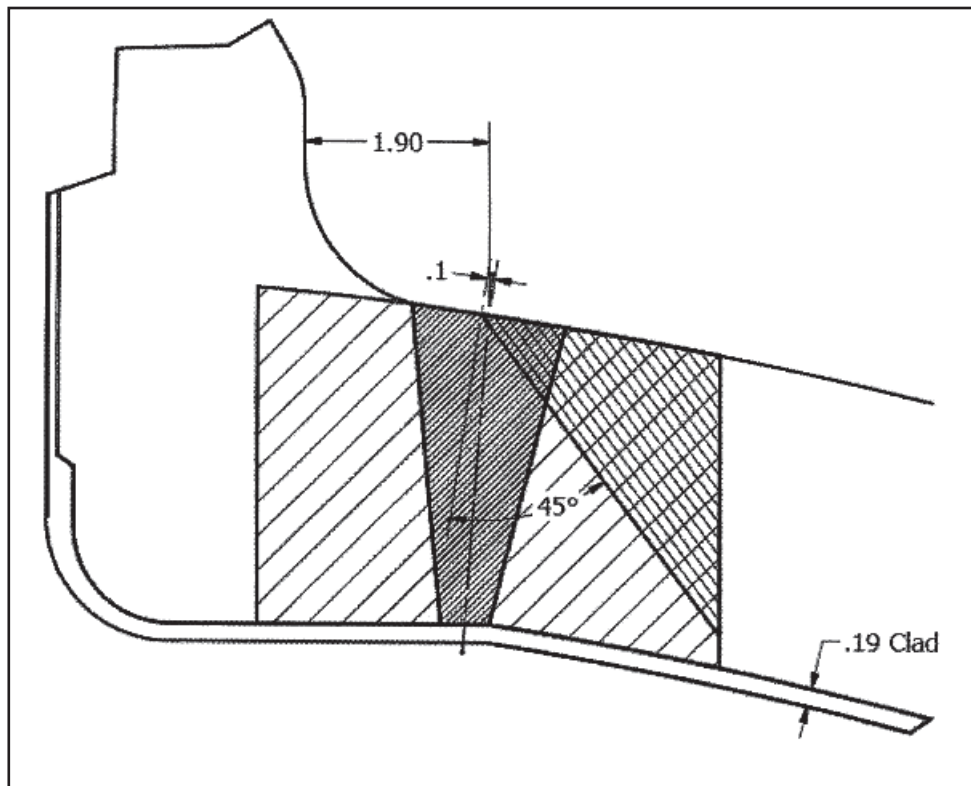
Weld WP-11, 45° Nozzle Side Axial Scans
